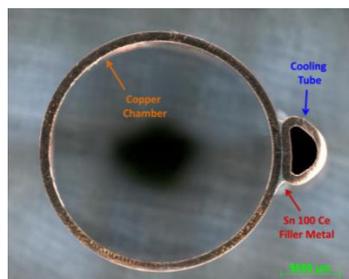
Multipole vacuum chamber cross section with the vacuum soldered special shaped cooling tube.
